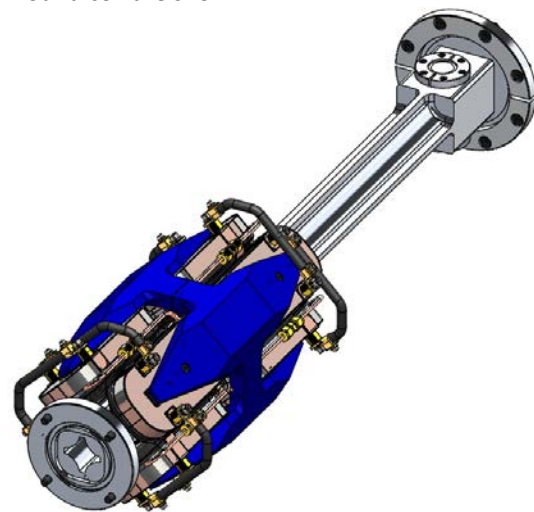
Integrated Quadrupole/Steerer Doublet Magnets on friction stir-welded aluminium beampipe/support/alignment component with roughing port. Total weight ~50 kilograms.
